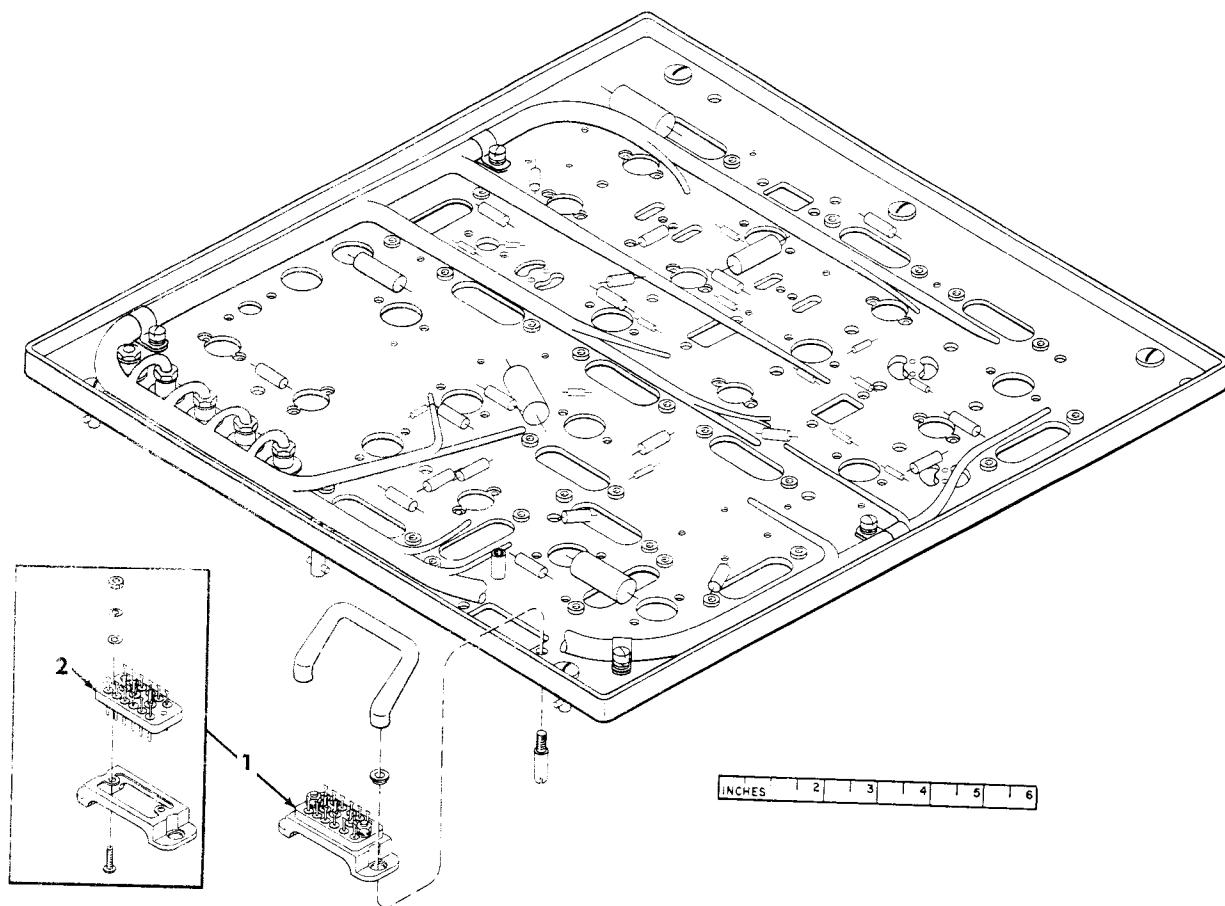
Coder, radar, guided missile (8159349)—partial exploded view
